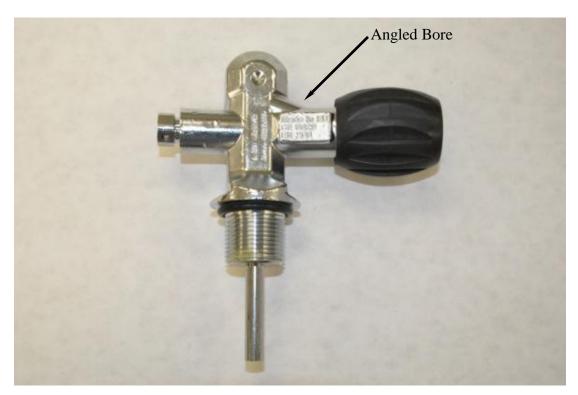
Rear view of the assembled exemplar cylinder valve showing the angled bore housing that connects the high pressure regulator port to the valve system assembly chamber.
